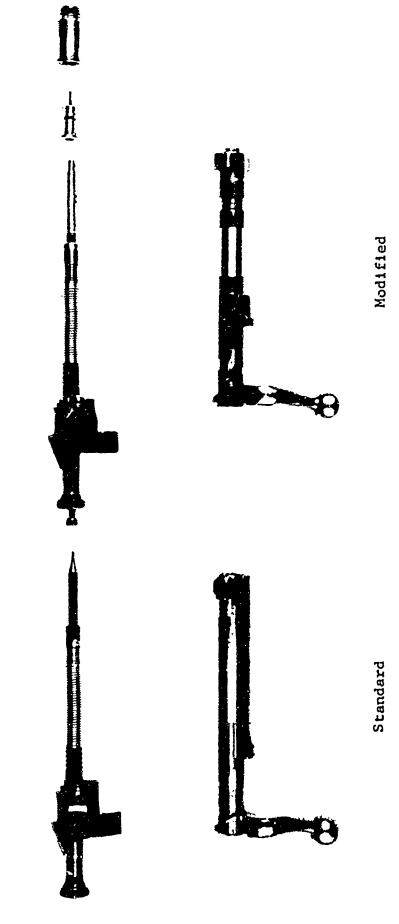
Springfield 1903 Bolt Assemblies - Unassembled view
